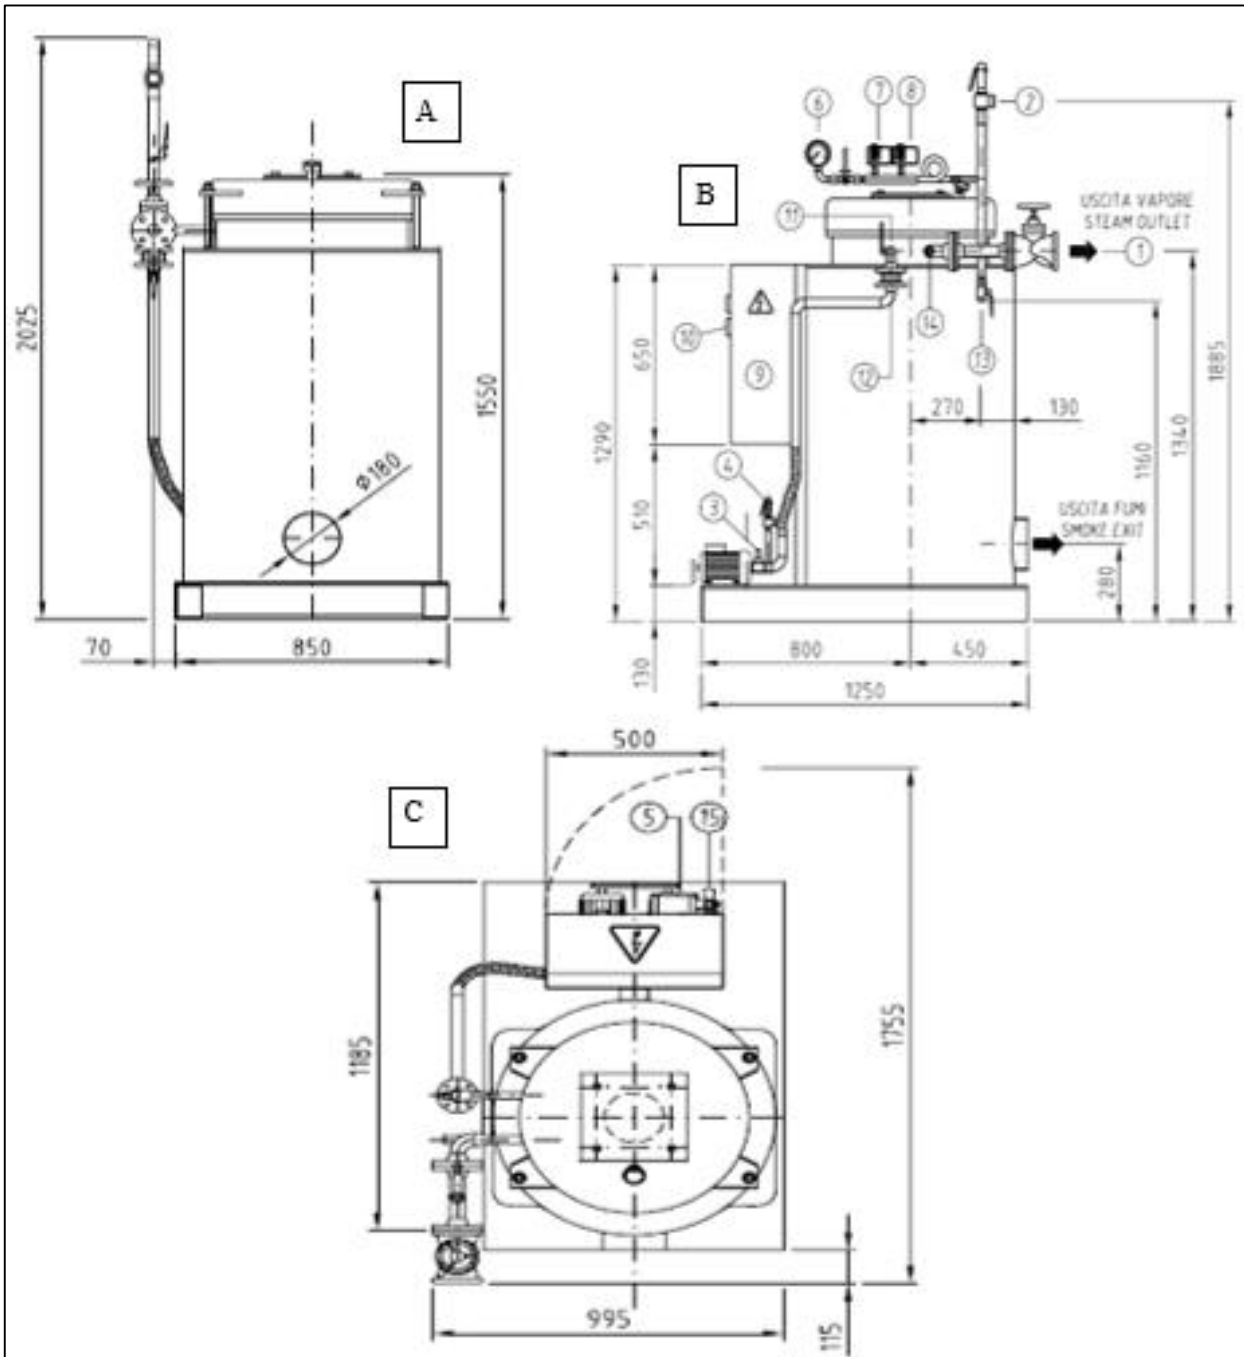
Schematic View of GMT/20-V Boiler: A- Front View B- Side View C- Top View and 1- Steam Outlet Valve, 2- Safety Valve, 3- Flow Switch, 4- Over Pressure Valve Outlet, 5- Feed Water Pump, 6- Pressure Gauge, 7- High To Low-Pressure Switch, 8- Safety Pressure Switch, 9- Electric Panel, 10- Steam Thermostat, 11- Back Washing Blow-Down, 12- Check Valve, 13- Start-Up Blow-Down, 14- Thermostat Prop, 15- Water Inlet [50]
